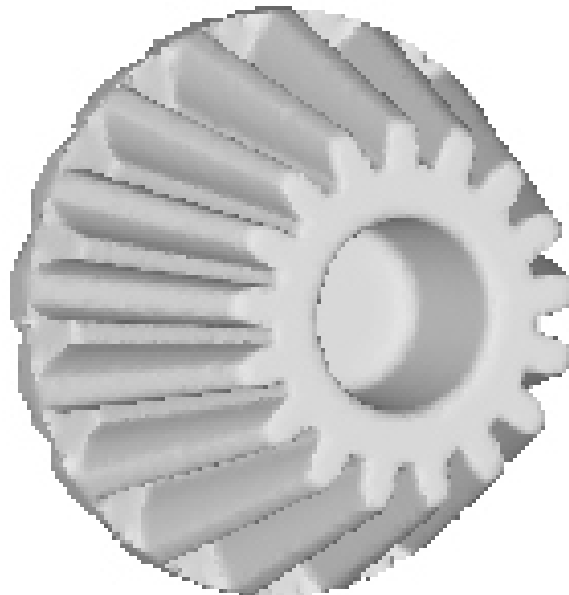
Conical toothed wheel forging shape calculated by FEM
